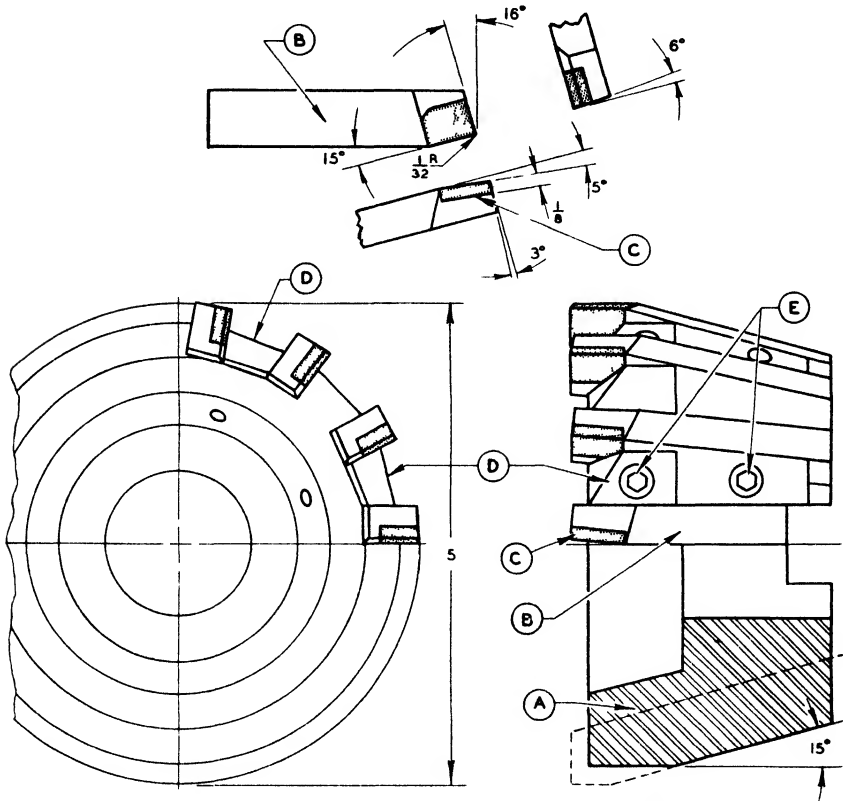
A Typical Shell-Type End Mill with Inserted Carbide-Tipped Blades
